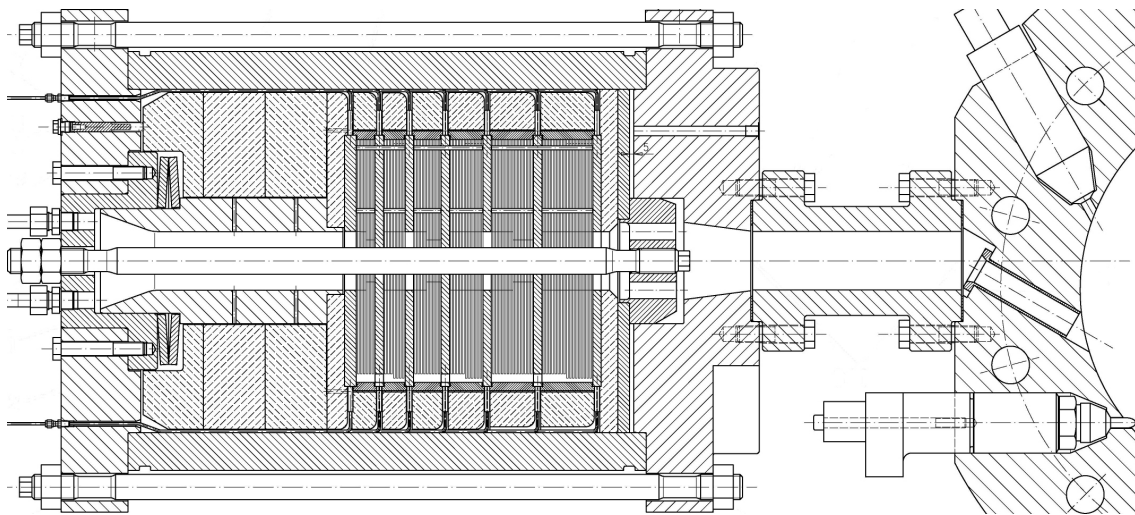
Assembly drawing of the regenerator, connected with a flange to the spray/combustion chamber.
